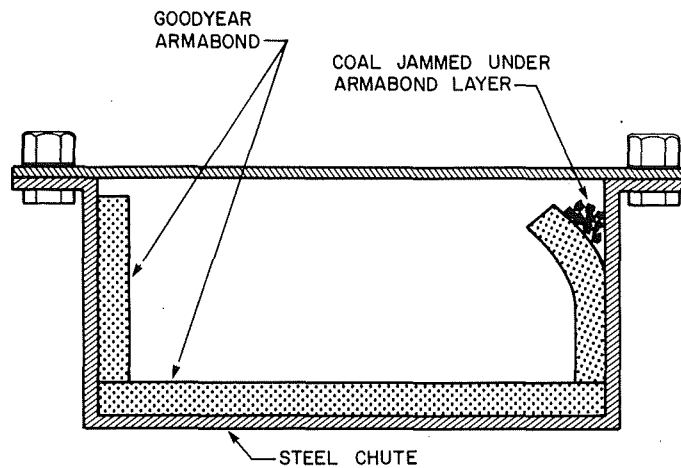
CHUTE NO. 4 CROSS SECTION, SHOWING LOCATION OF ARMABOND SEPARATION.
